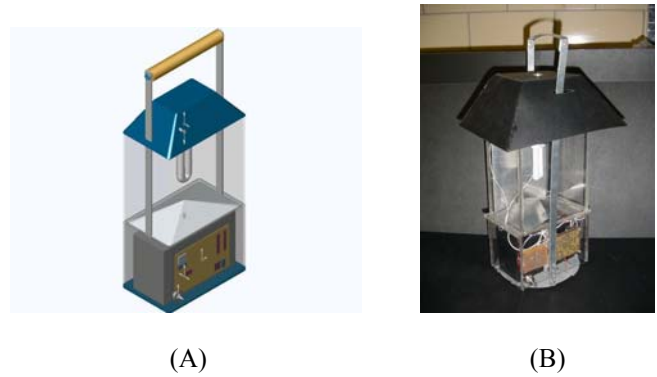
Lantern assembly. (A) three dimensional assembly. (B) Actual prototype, handle attached to the base.
